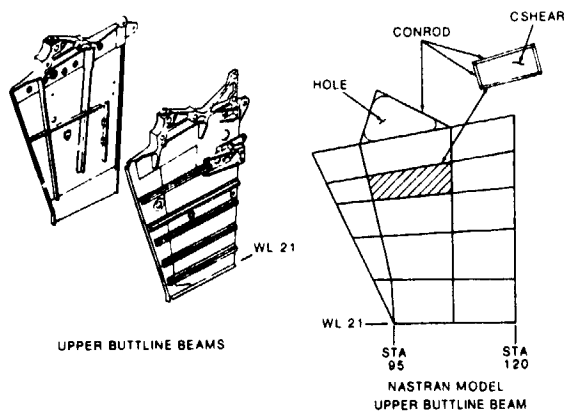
Static Modeling Guides - Bulkheads, Decks, and Butt-Line Beams
